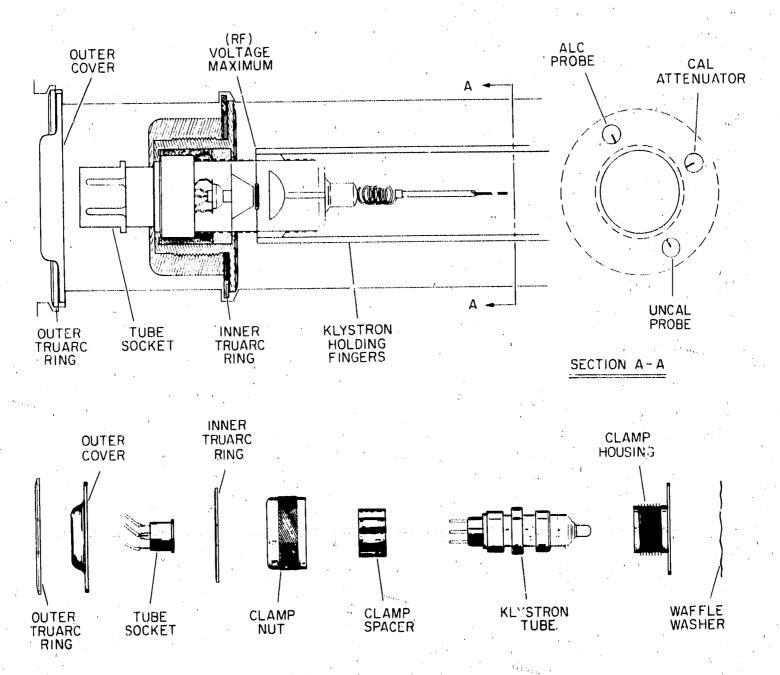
Klystron Cavity Assembly, Cutaway View
